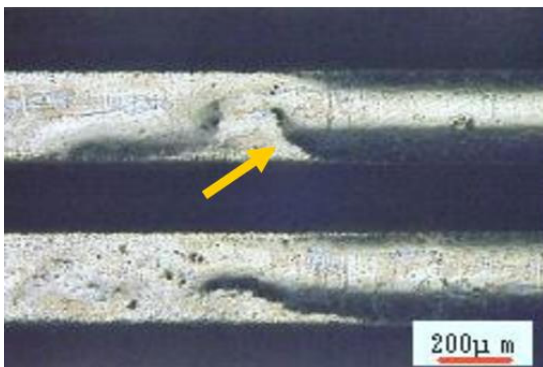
Detail of PCB soldering pad with HASL surface finish [8].
